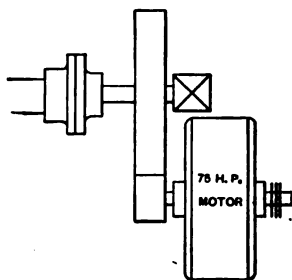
WEBB CALENDER—ONE-MOTOR DRIVE, DIRECT GEARED.
